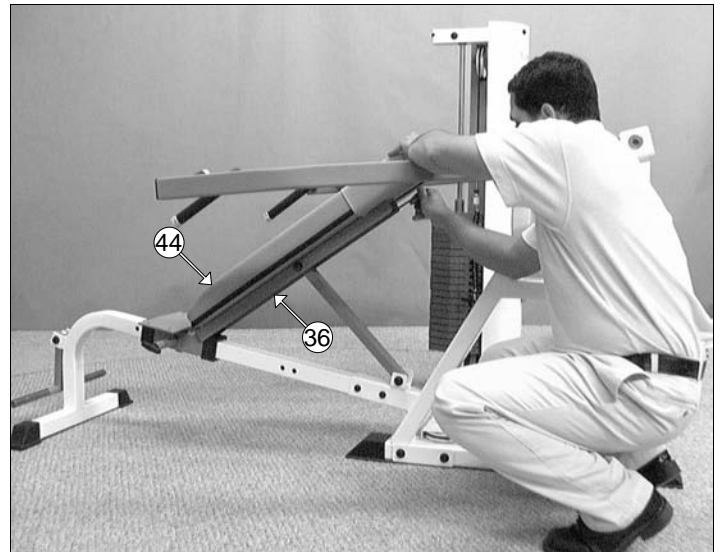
Affix the Back Pad (#44) to the Bench Back Pad Frame (#36), in the position as shown above, using two Flat Head Socket Cap Screws 3/8-16 X 1 1/4 (#25). Use the supplied Hex Key 7/32" (#93) for securing both Flat Head Socket Cap Screws.
